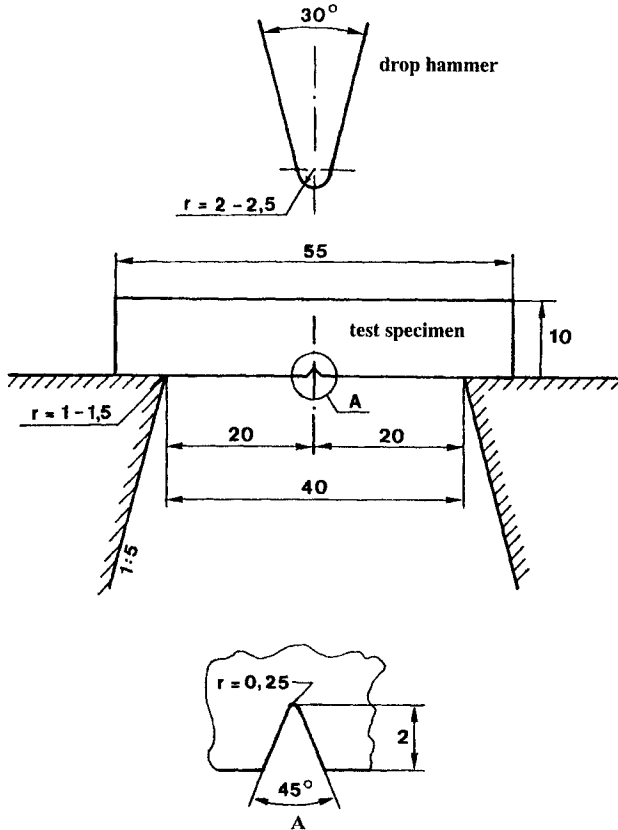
Charpy-V test of specimens. The dimensions are in mm.
